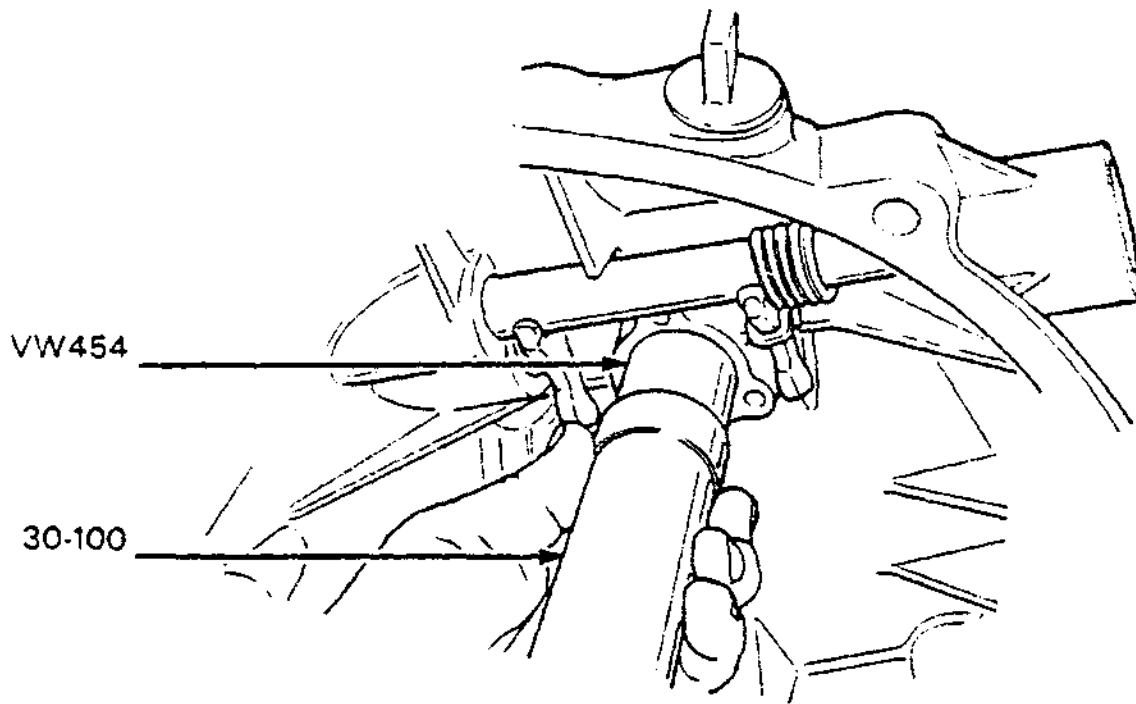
Installation of Transaxle Input Shaft Oil Seal
